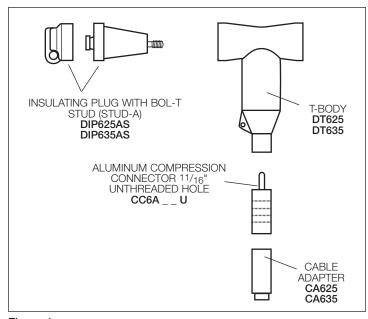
BOL-T Connector Kit (BT6_5) Components. For more details, see catalog sections 600-10, 600-30 and 600-50.
